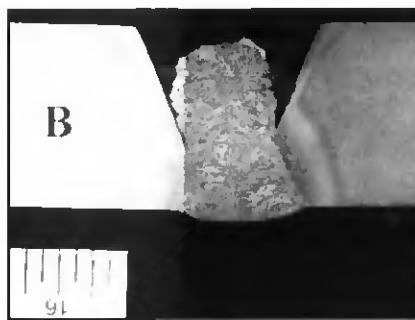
A cross section of a completed weld in which the root weld was affected by arc blow ($RO = 6.4 \text{ mm}$; $I = 900 \text{ A}$). Note incomplete fusion on the right side of the fill weld.
